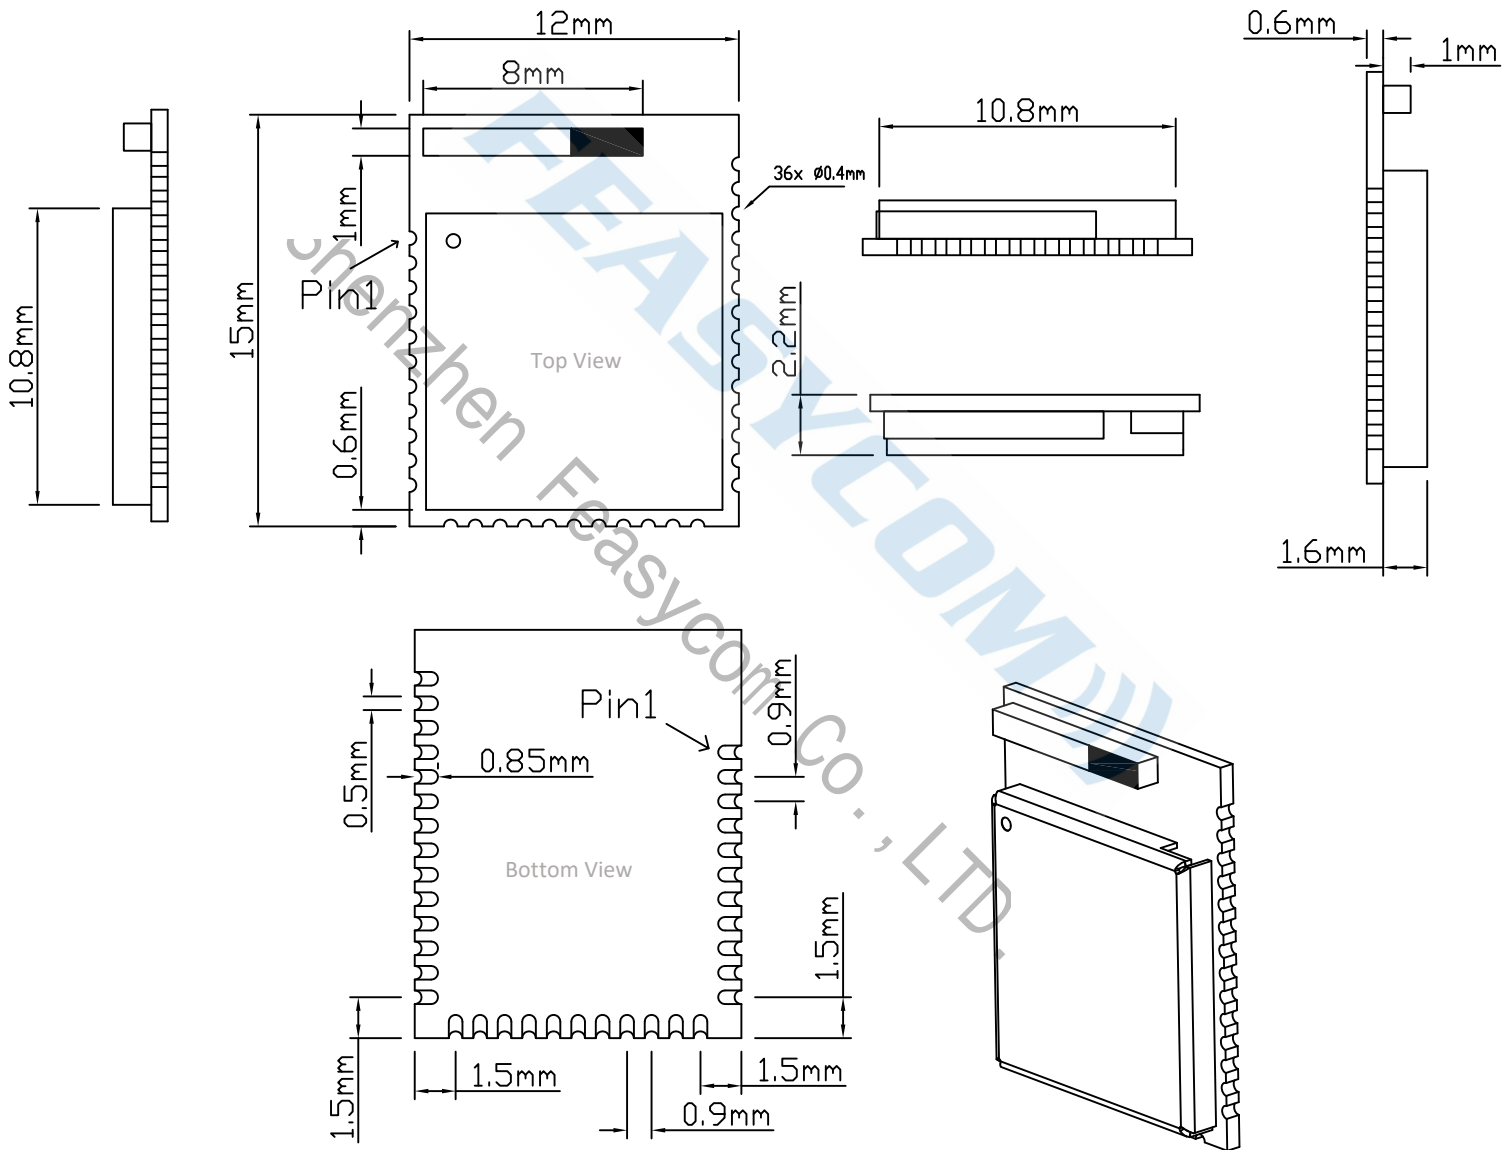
FSC-BT631S footprint Layout Guide (Top View)
